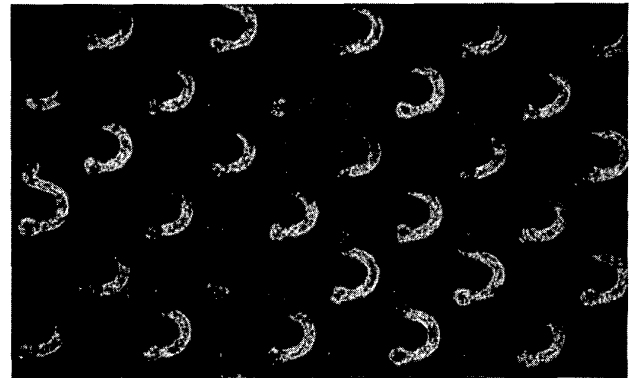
Assembled die showing clear evidence of solder wicking due to the use of a flux that is too aggressive.
